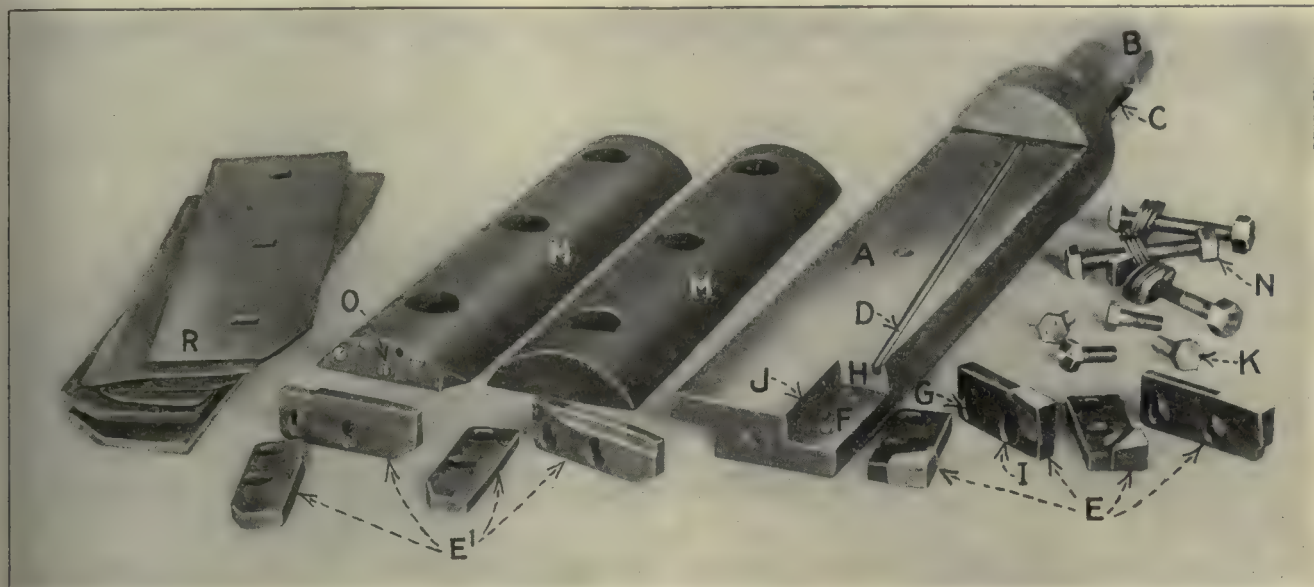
COMPONENT PARTS OF COMBINATION BORING TOOL
